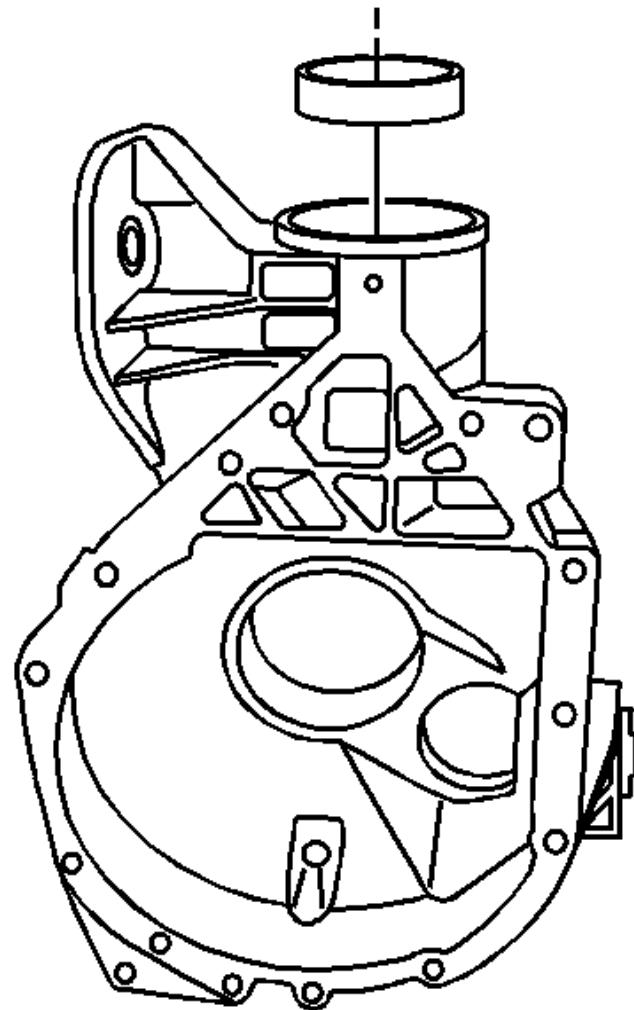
View Of Outer Pinion Bearing Cup & Bore
